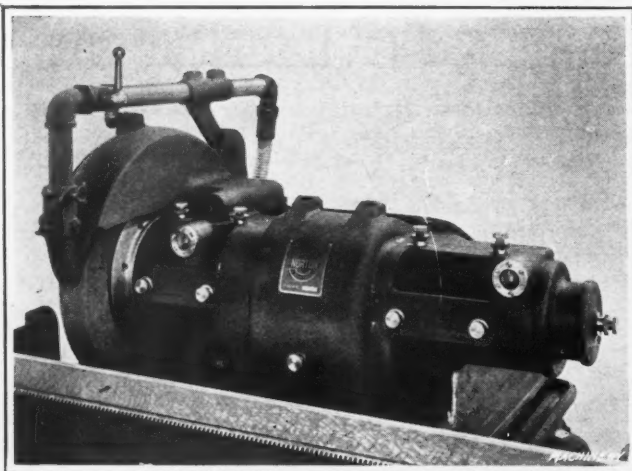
Detail View of Wheel-head, showing Adjustment Screws for Bearing Boxes
